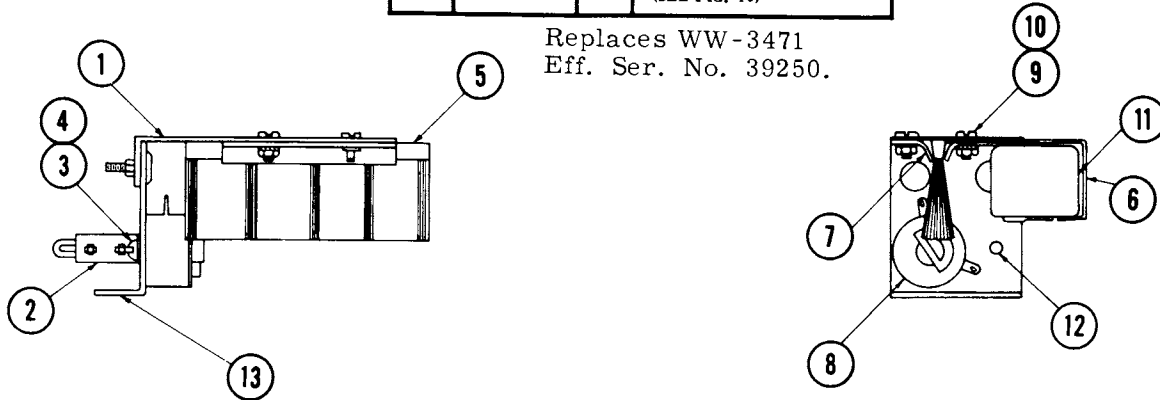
Assembly, Erase Magnet, WW-4670-1B (Part of Assembly, Figure 5).
